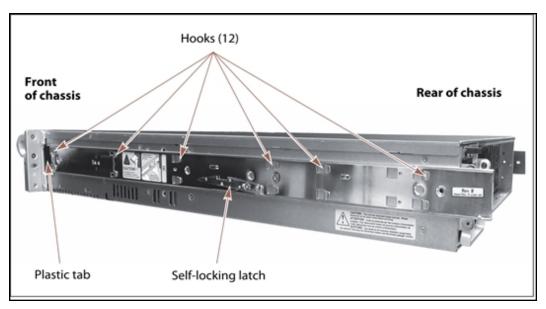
Install the inner rail over all hooks (BlackPearl gateway 2U chassis shown from left rear view).
